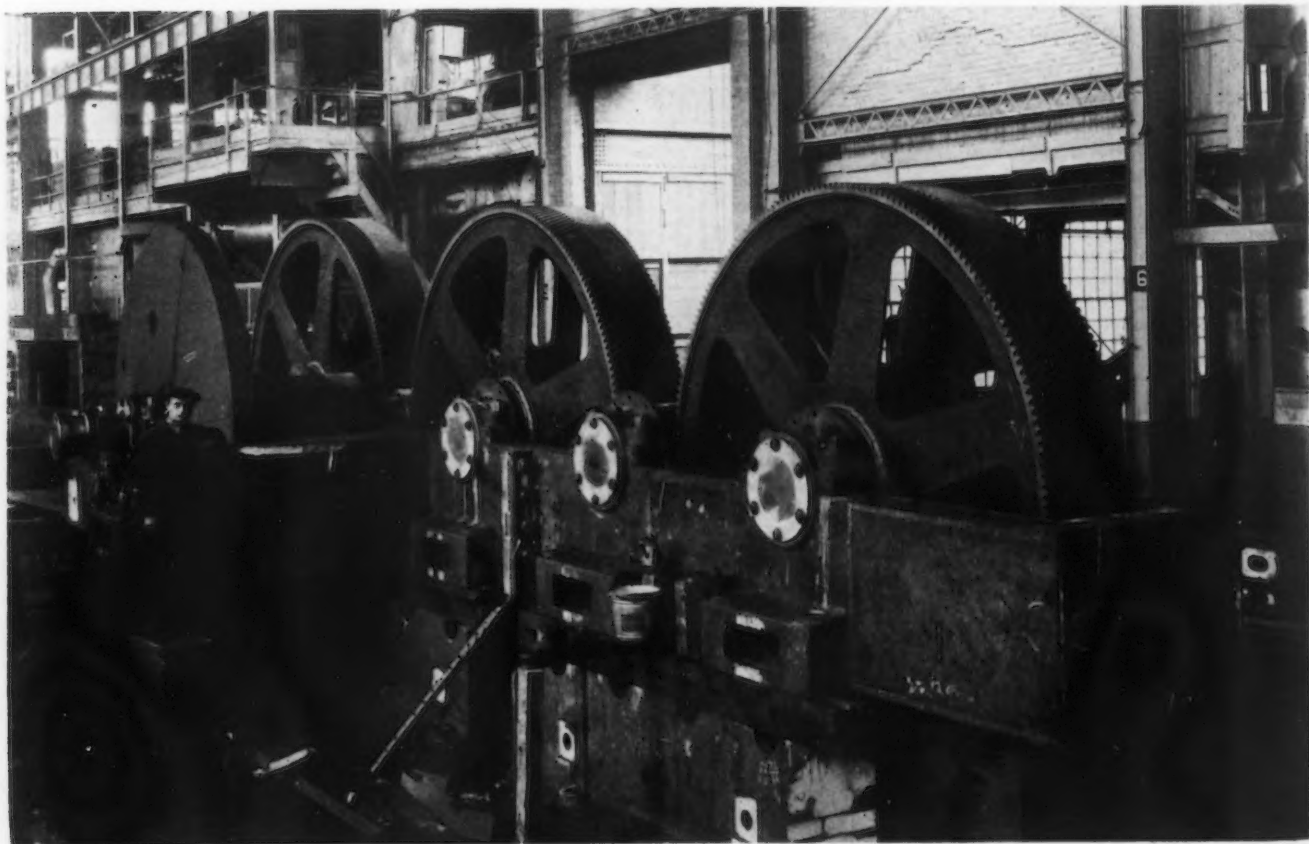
This 1000-hp. mill drive weighs 77 tons and was built from plate and steel castings by arc welding
